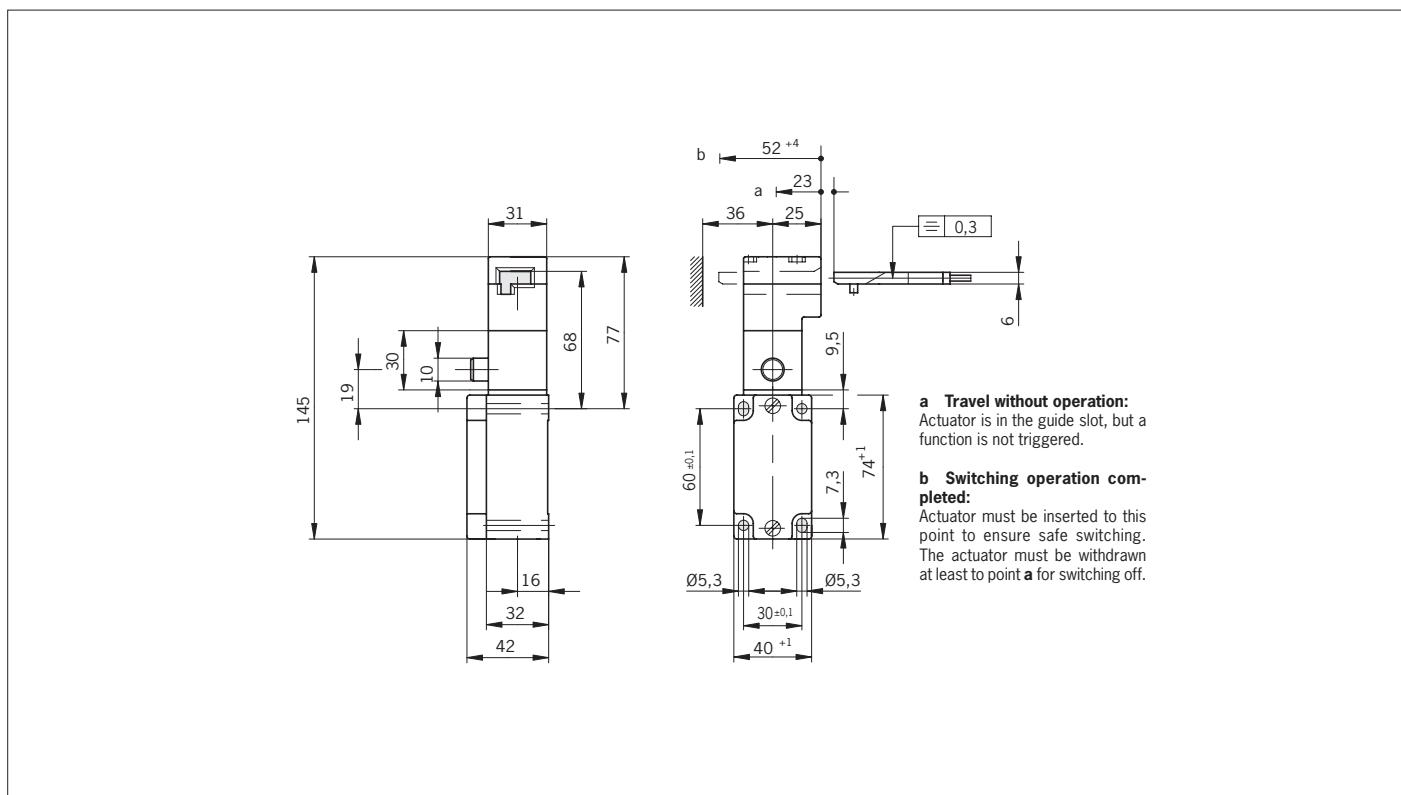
Dimension drawing for NZ1VZ...VSH with cable entry
